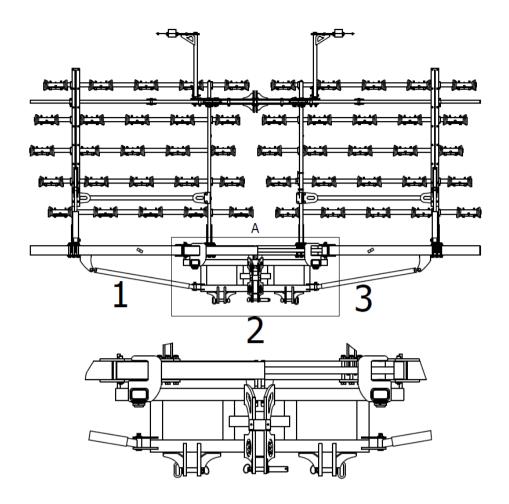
Parts of the MBS straw breaker: 1 - right frame with working section, 2 - drawbar, 3 - left frame with working section.
